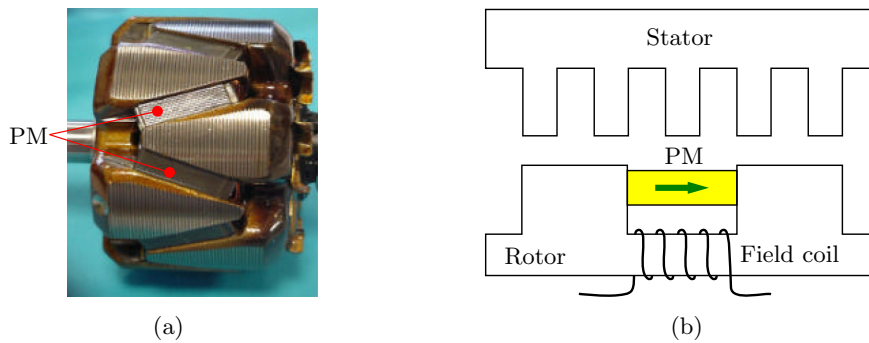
Claw-pole DESM topology. a) Claw-pole rotor. b) Circuit scheme of the machine
